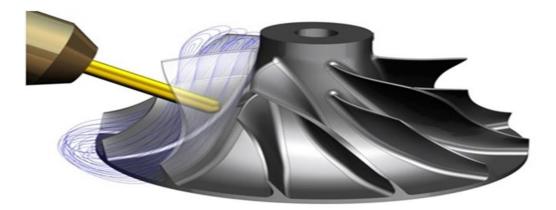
Direct 3D open impeller machining via 5axis CNC machine [25]
